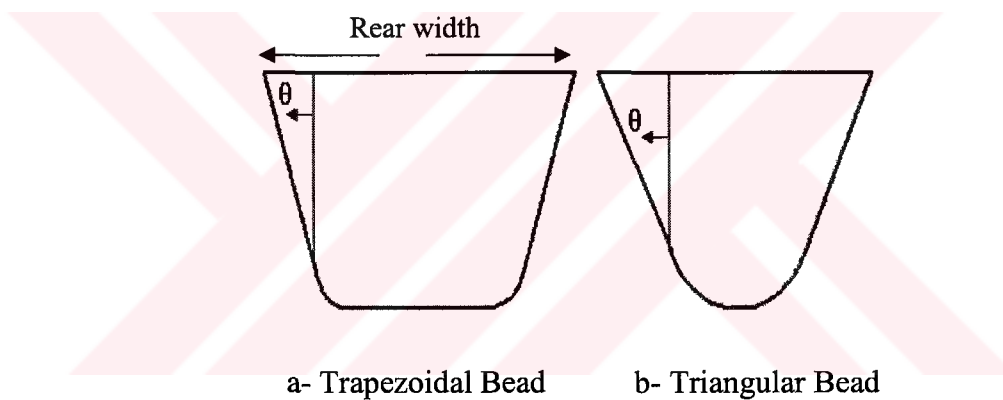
Drawbead Shapes: Trapezoidal and Triangular Bead
